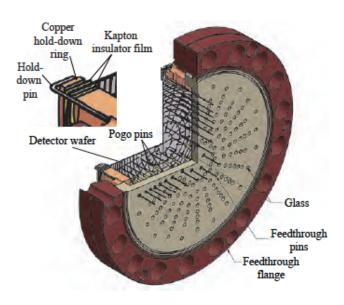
Mounted detector wafer (back) with spring-loaded pogo pins and feedthrough flange. The inset is a close-up view of the detector compression scheme.
